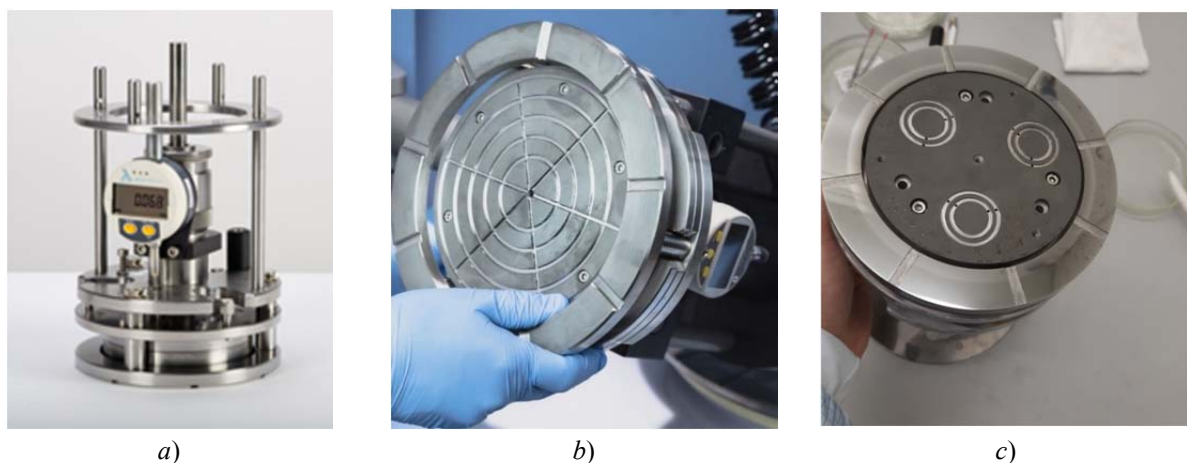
Tooling for the polishing unit: a) – appearance; b) – standard vacuum chuck of the tooling; c) – tooling modification by adding a prototype model of a new vacuum chuck
